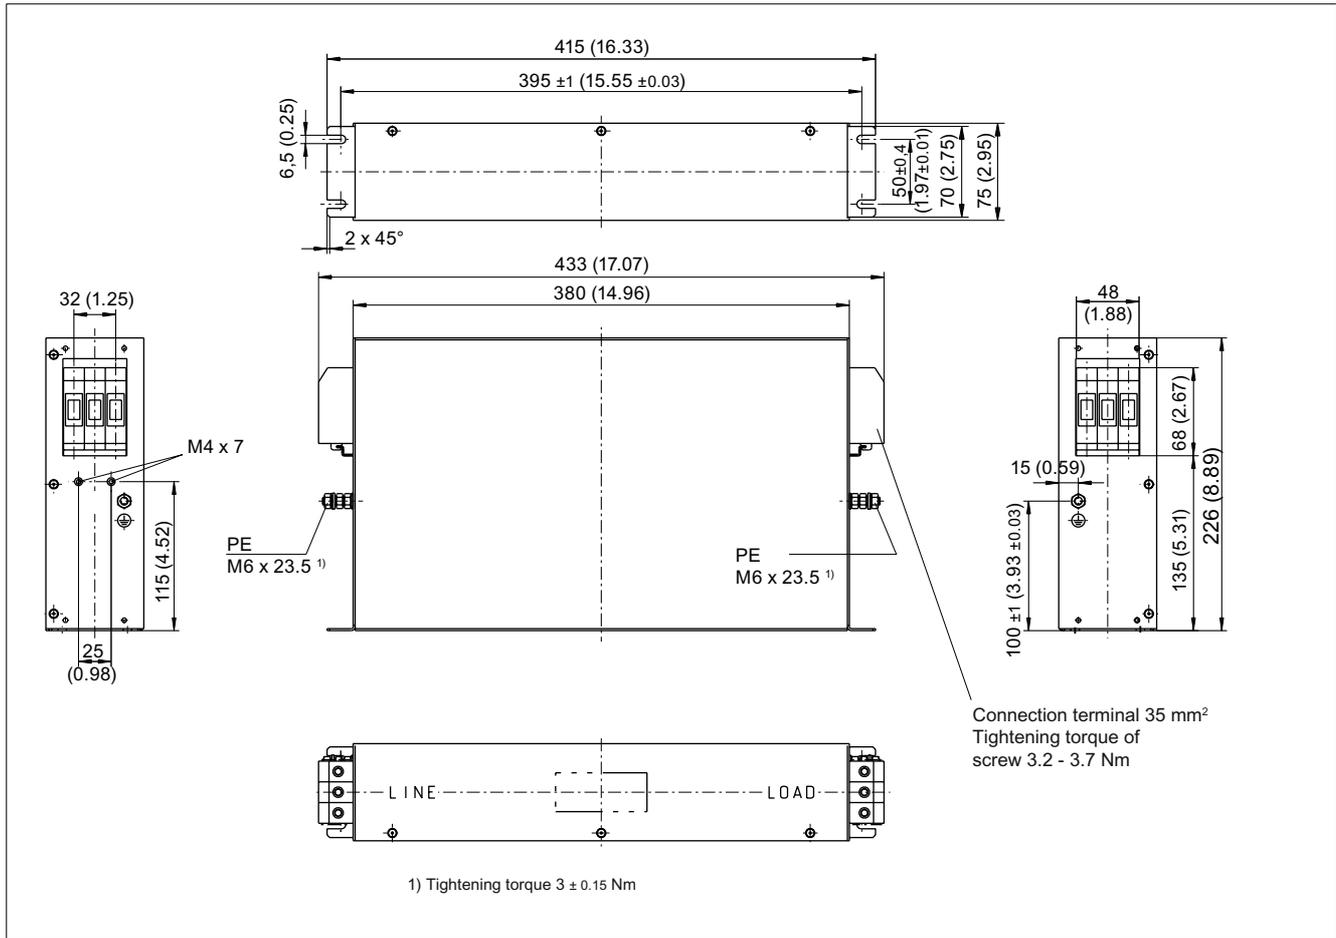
Dimension drawing of Basic Line Filter 36 kW, order number 6SL3000-0BE23-6DA1, all dimensions in mm and (inches)
